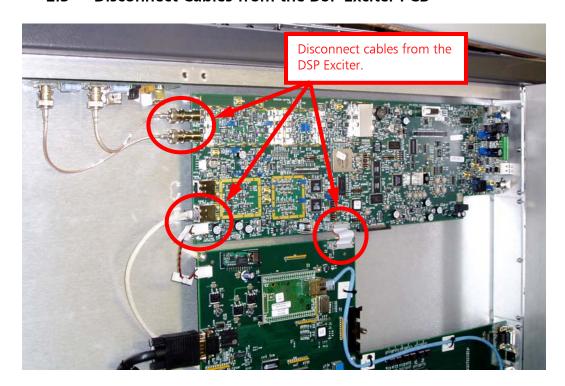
Disconnect Cables from the DSP Exciter PCB
